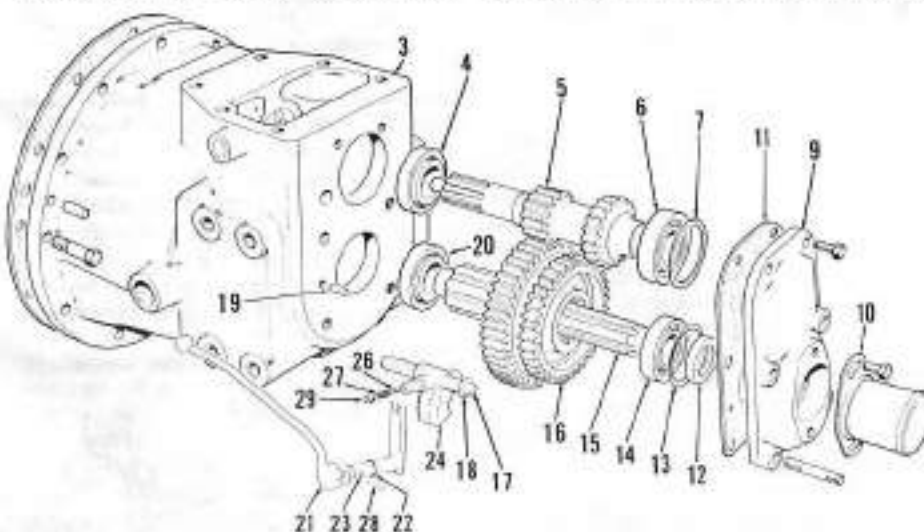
Exploded view of multi speed pto available for 1210, 1212, 1410 and 1412 models. Sliding gear (16) on output shaft (15) engages either the low speed (front) gear or high speed (rear) gear machined on input shaft (5); a neutral detent for shift fork (24) is also provided.
